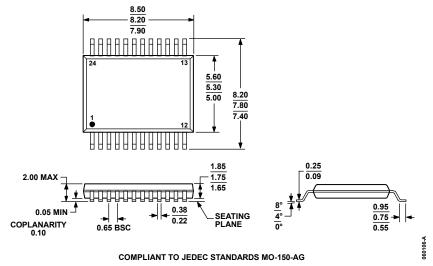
24-Lead Shrink Small Outline Package [SSOP] (RS-24) Dimensions shown in millimeters
